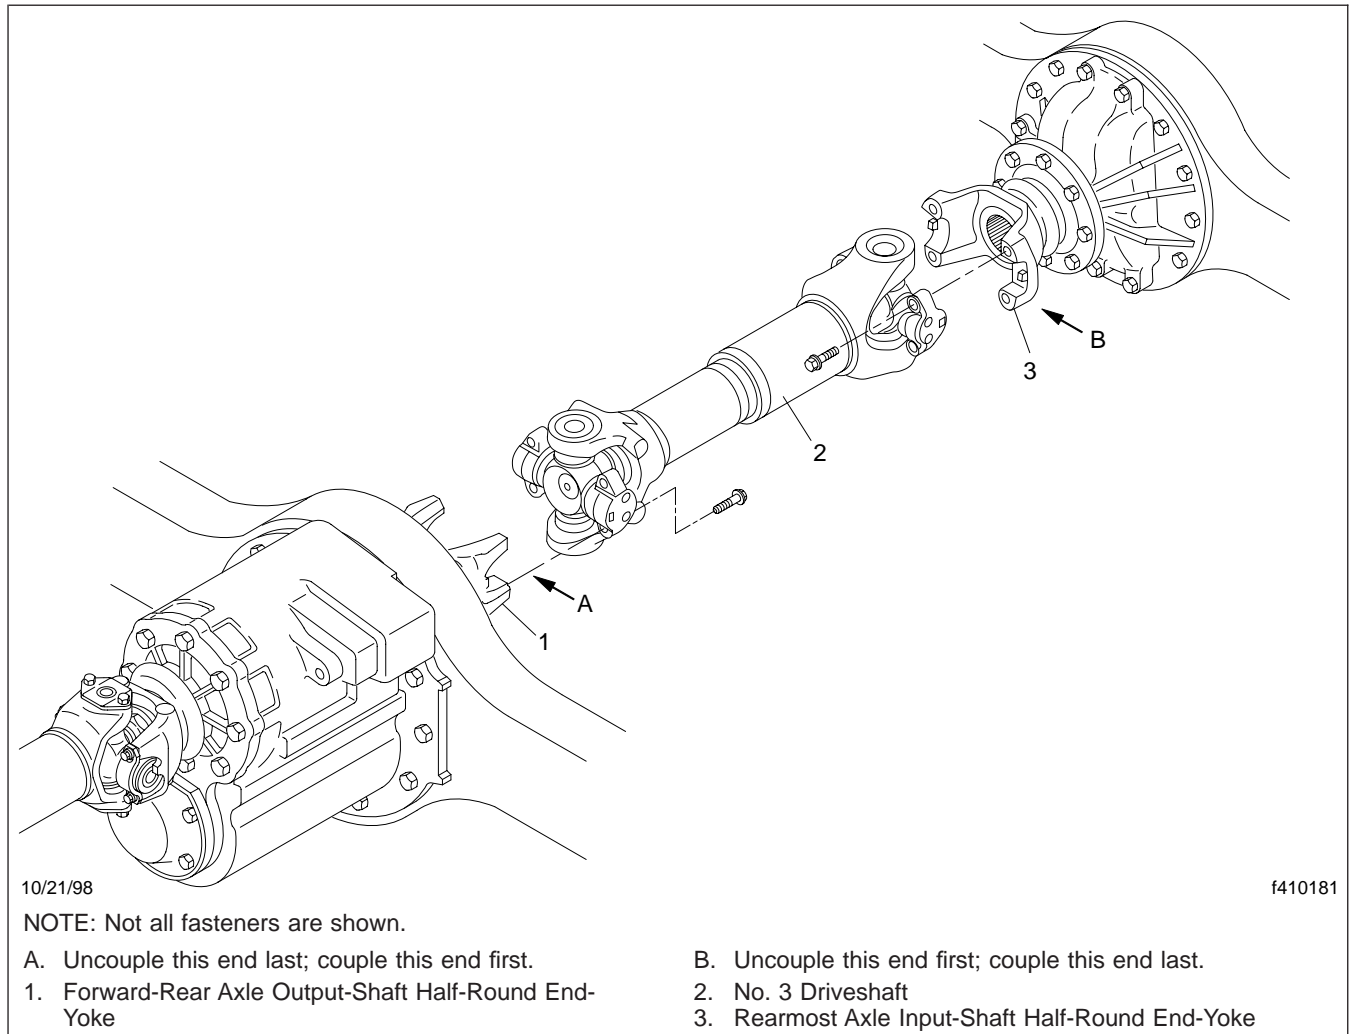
, Removal/Installation of a No. 3 Driveshaft With RPL U-Joints
